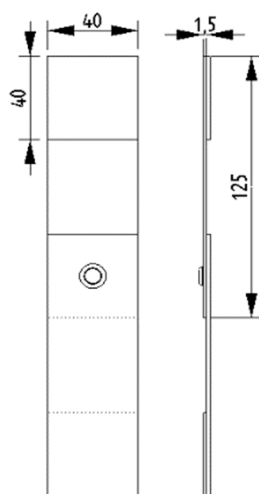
Geometric and dimensions of the tensile-shear SPR specimen
